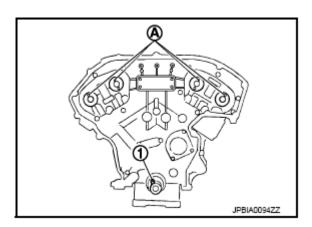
Identifying Cylinder Head Dowel Pin And Crankshaft Key Courtesy of NISSAN NORTH AMERICA, INC.
